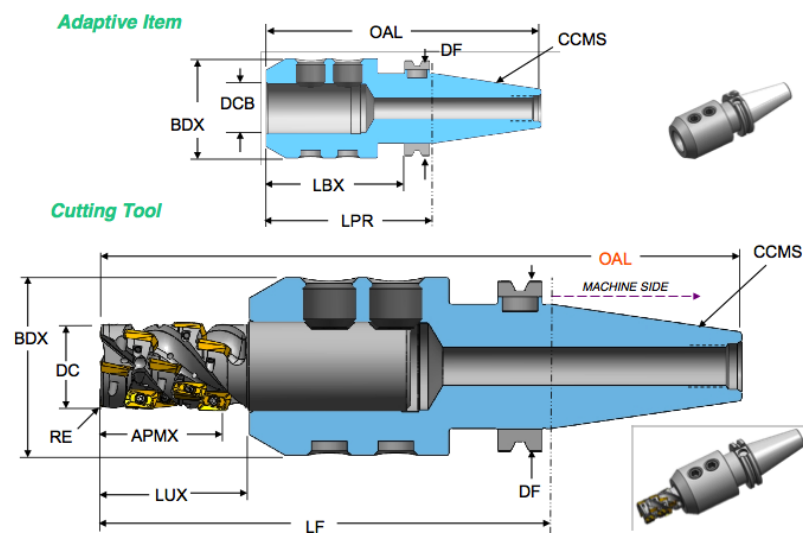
Cutting Tool, Tool Item, and Cutting Item 2
